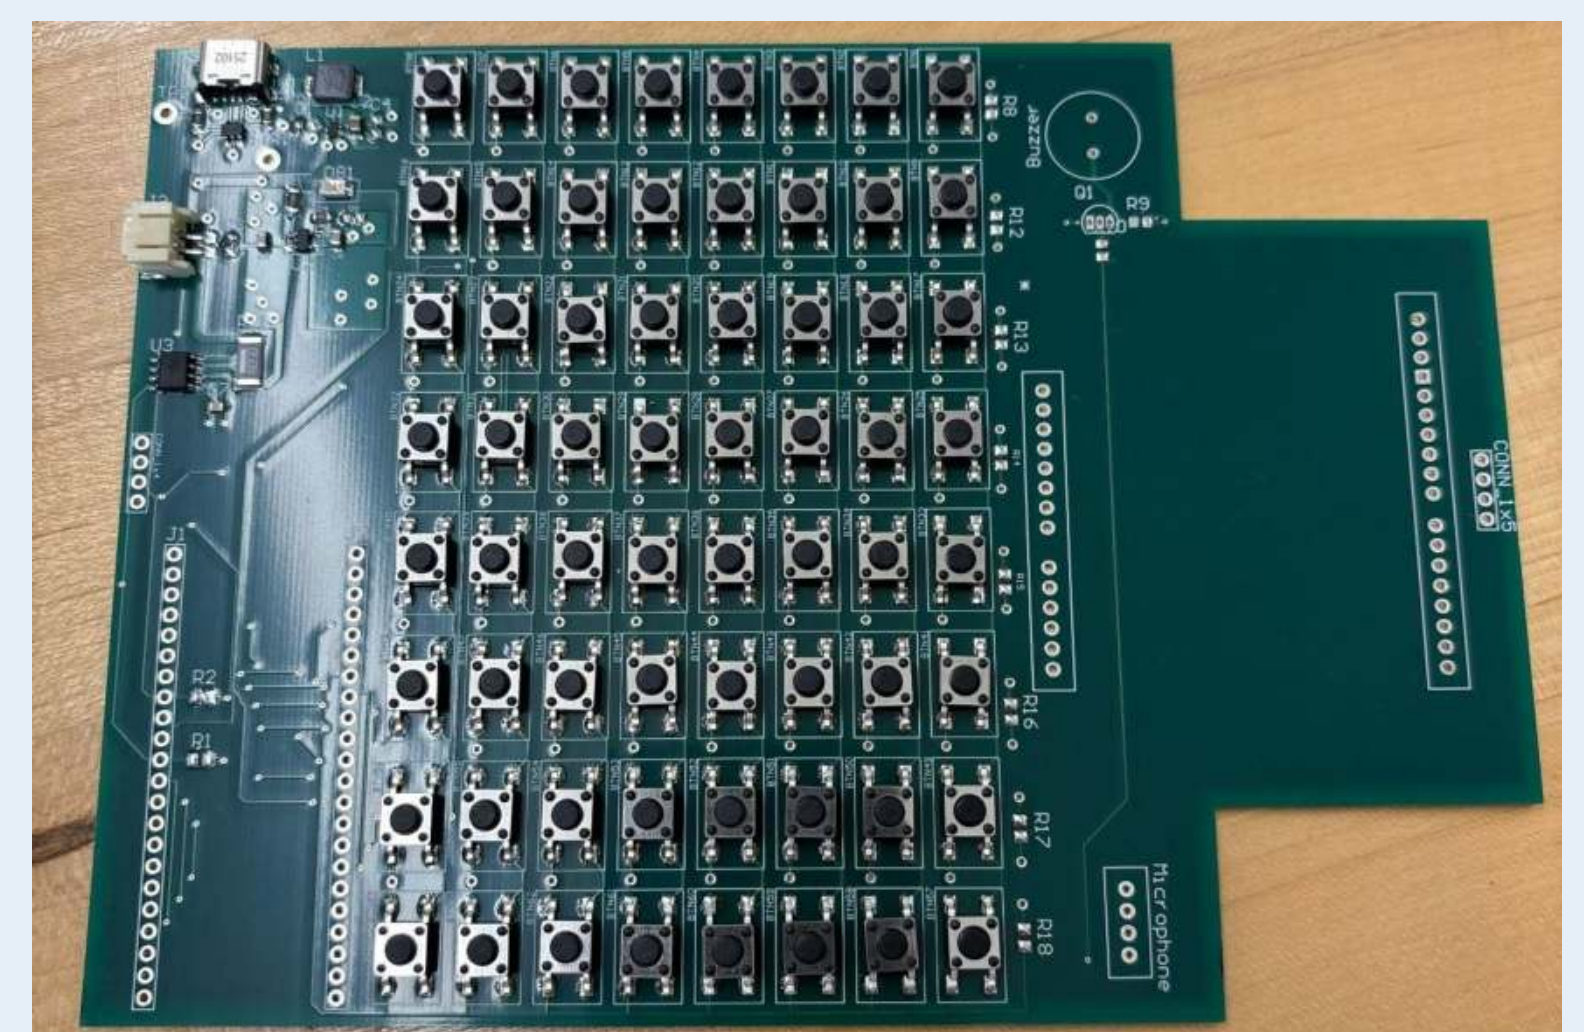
Physical PCB Assembly of Version 1 with headers not in place
